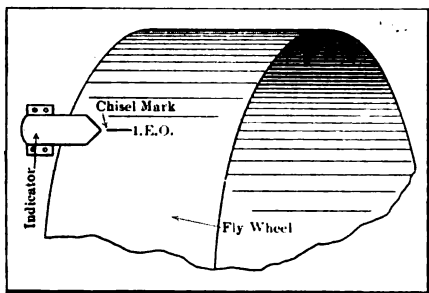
Method of marking the flywheels of a motor so as to replace timing mechanism properly
